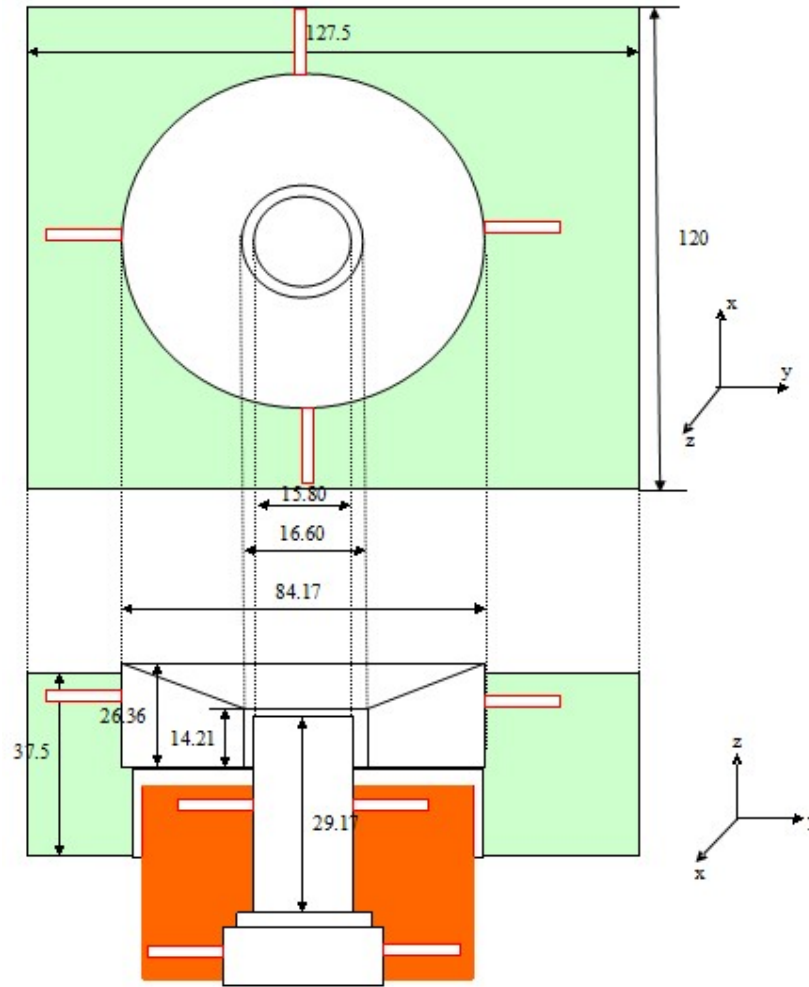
The housing design for the FUS and imaging transducer (measurements are in mm).
